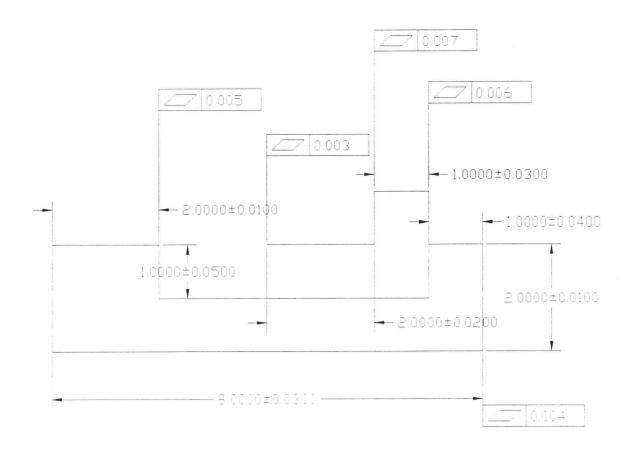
An Assembly Drawing with Conventional Tolerances and GD&T Symbols (Flatness)
